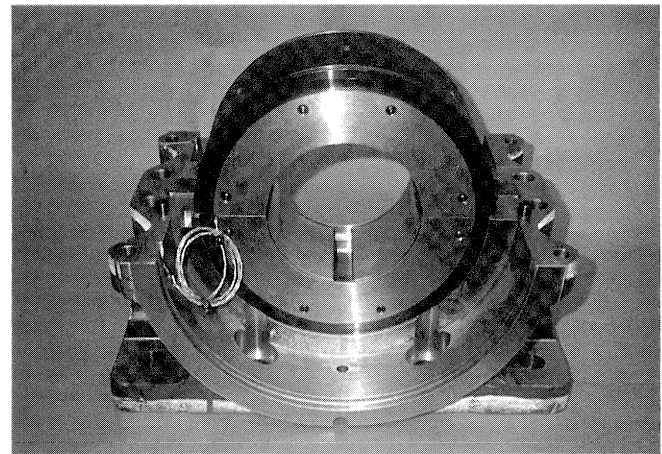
Steam End Tilting Pad Damper Bearing and Arc Spring in the Lower Half Housing.
